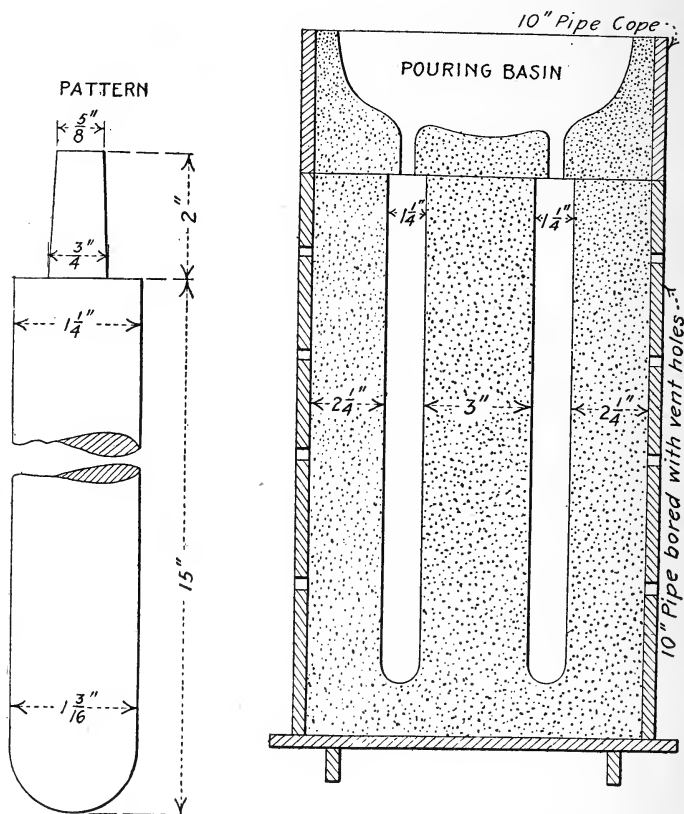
DETAILS OF PATTERN AND MOLD REQUIRED FOR ARBITRATION BARS IN TESTING GRAY-IRON CASTING MATERIAL
